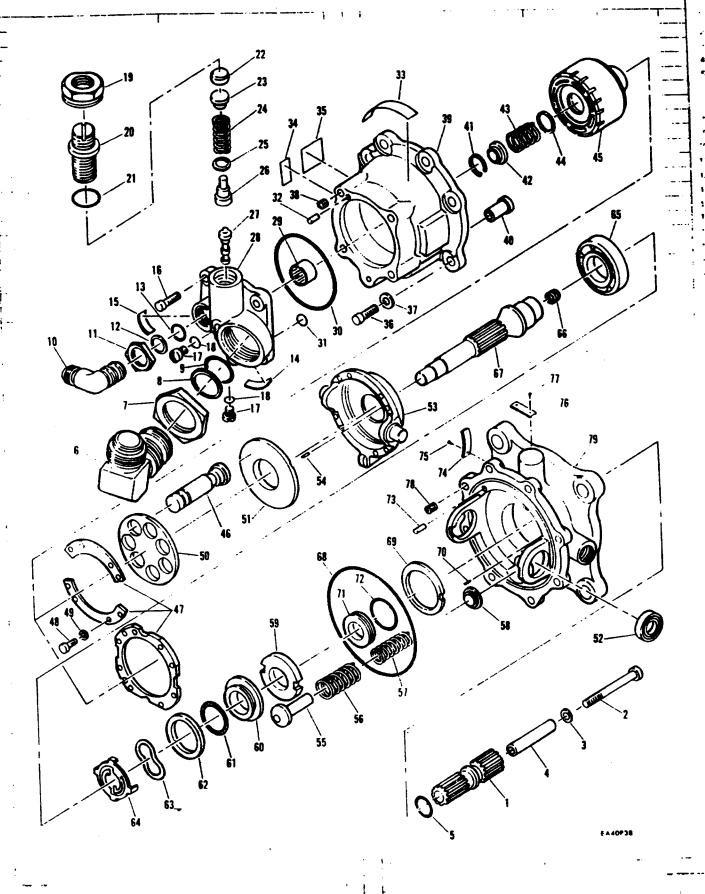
In-Line, Variable Displacement Hydraulic Pump Assembly, Exploded View
